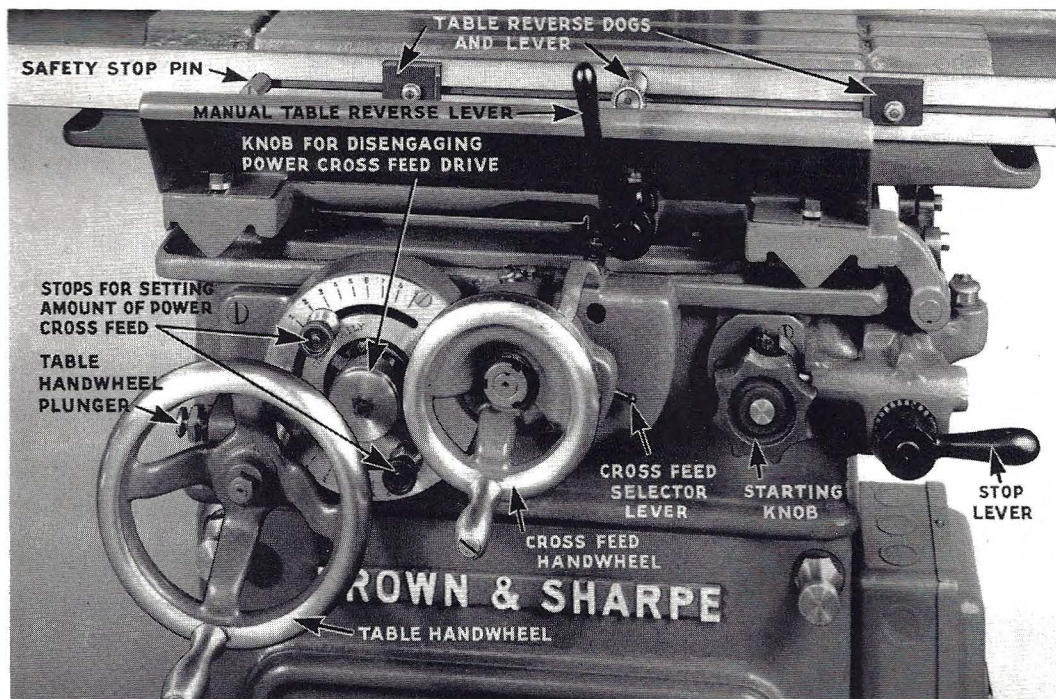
Controls and adjustments at front of No. 2 Machine.
